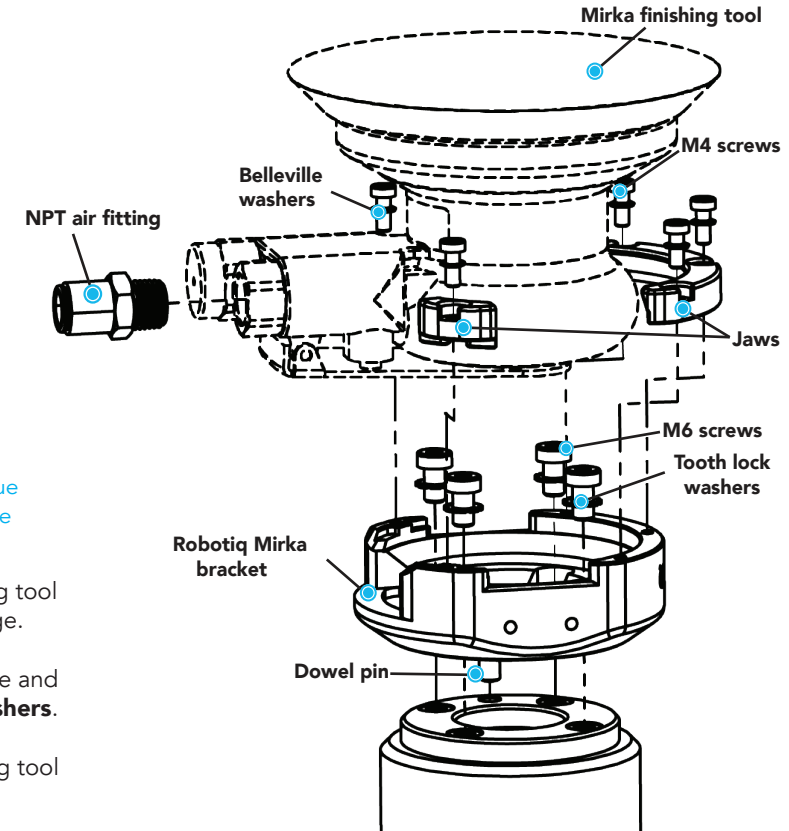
Surface Finishing Kit with Mirka finishing tool on e-Series Universal Robots
